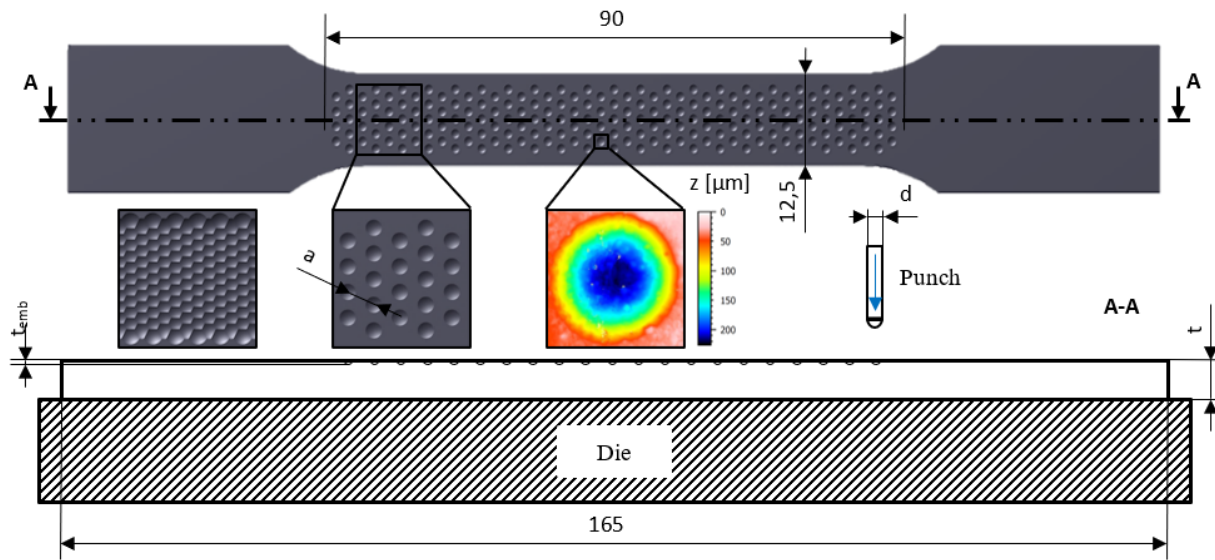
Schematic of the embossing process with exemplary embossing arrangements.
